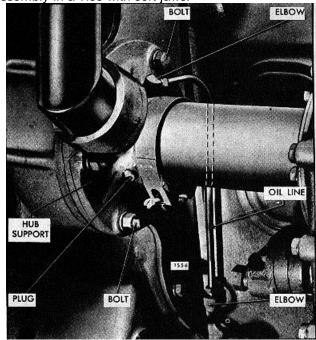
Blower Drive Gear and Support Assembly Mounting
